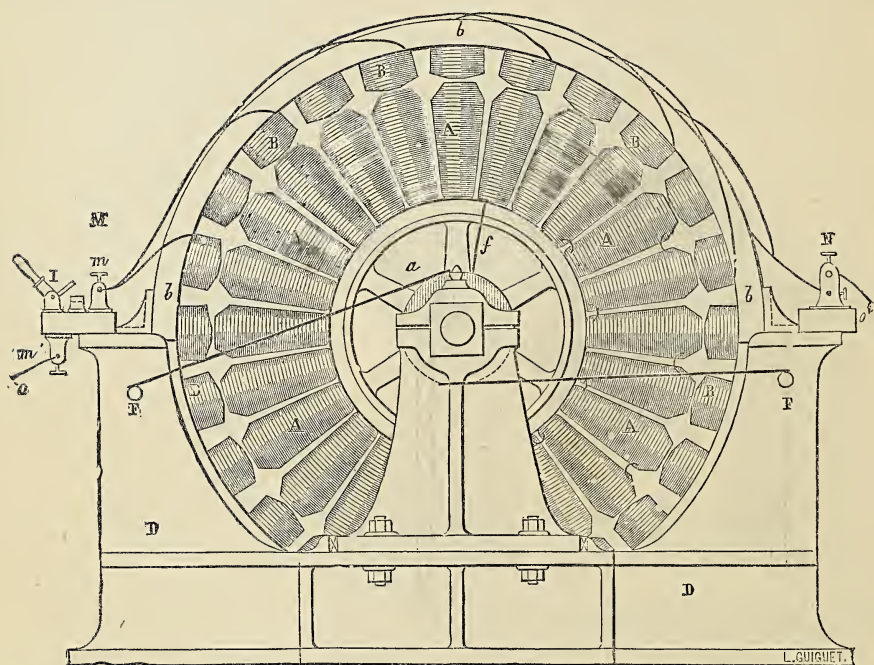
Lontin's Magneto-electric Distributing Machine, sectional view.
